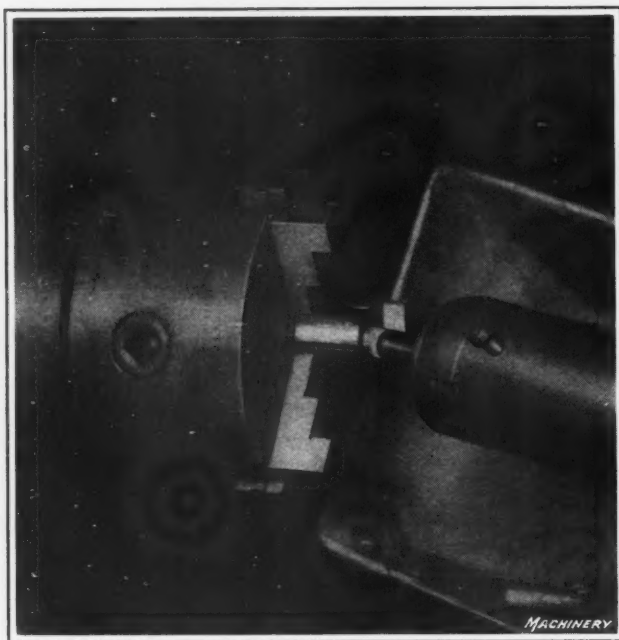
Internal Grinding Machine equipped for grinding Centers in Wrist-pins
